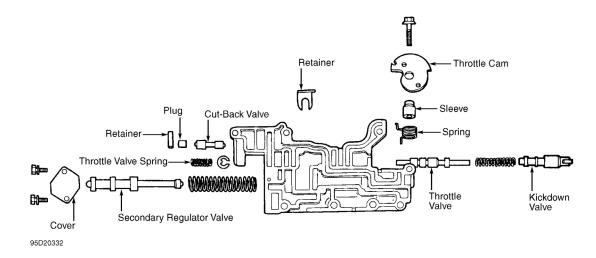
Exploded View Of Front Upper Valve Body Courtesy of MITSUBISHI MOTOR SALES OF AMERICA.
